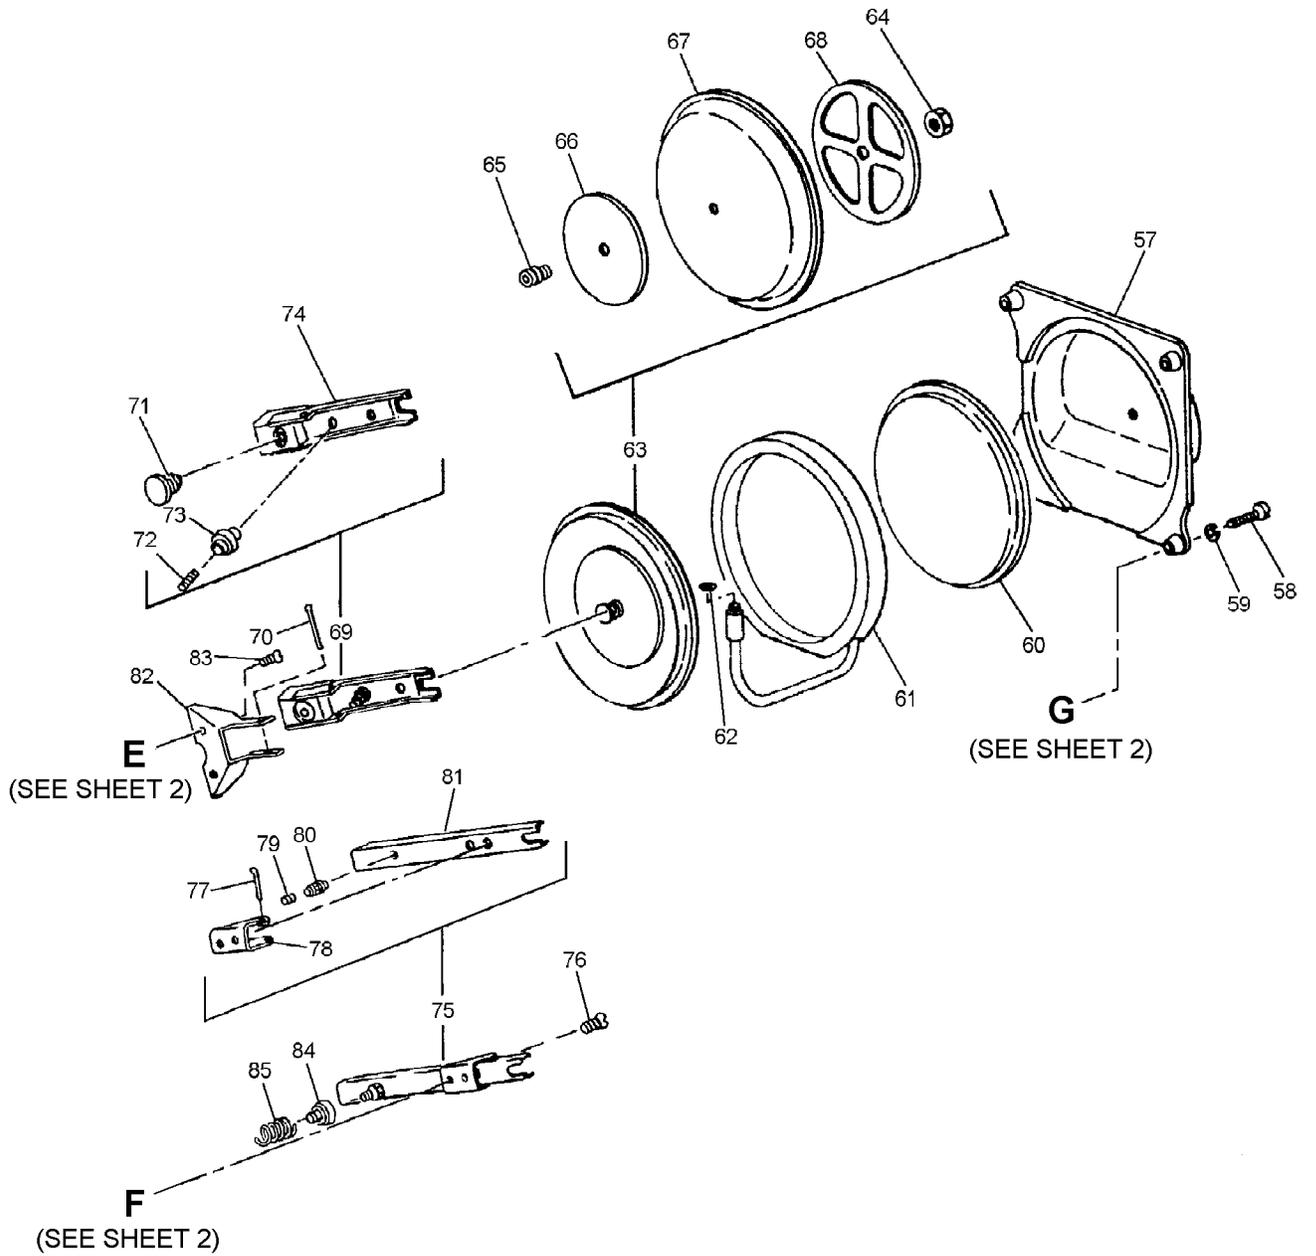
29255 Panel Mounted Oxygen Regulators (Sheet 3 of 3)
